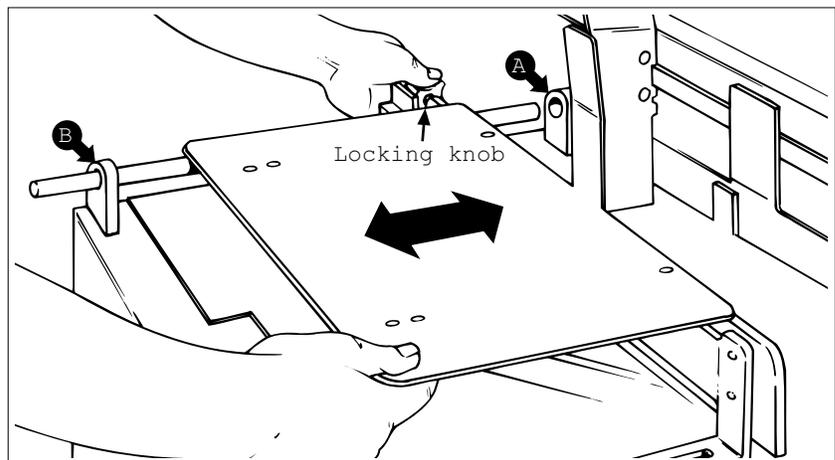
Back Jogging Plate/Back Hopper Guide Removal
